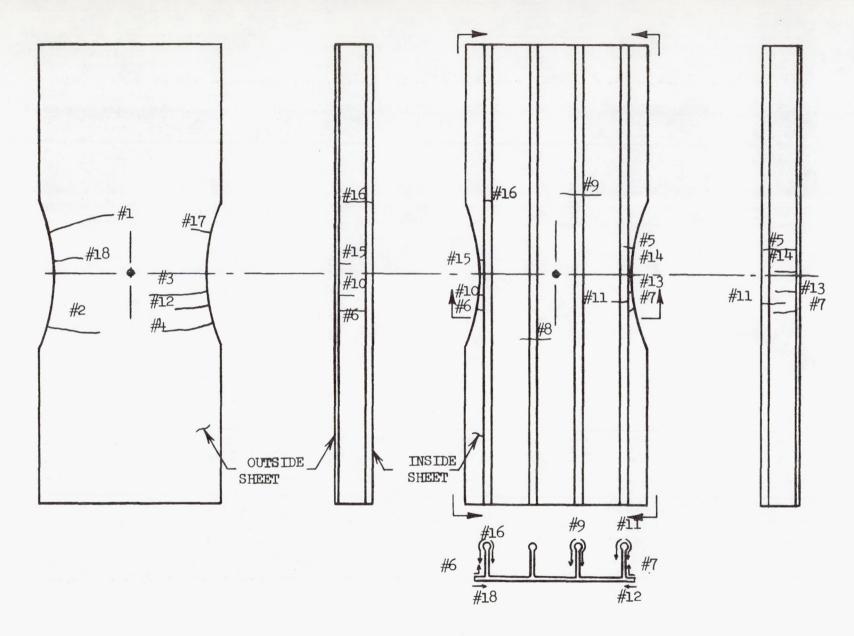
SECONDARY CRACK LOCATIONS ALUMINUM GRAPHITE PANEL #14C
